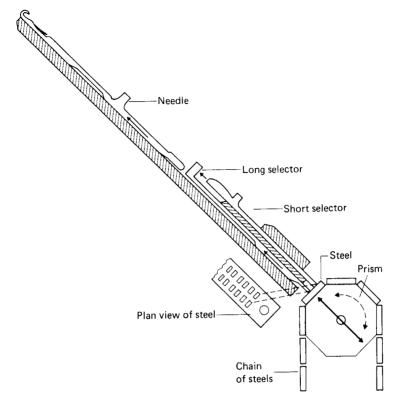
Mechanical jacquard selection on a V-bed flat machine.
